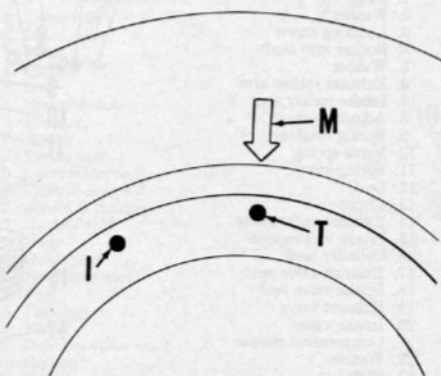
View of timing marks on crankshaft pulley used on some models.
